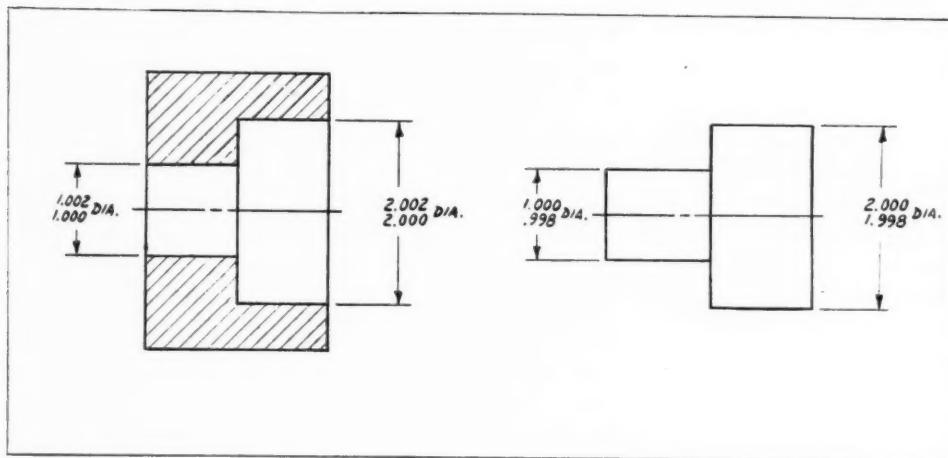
When composite dimensioning is employed, full design tolerance becomes available to the shop. In this drawing, the tolerances include an allowance for clearance and eccentricity
